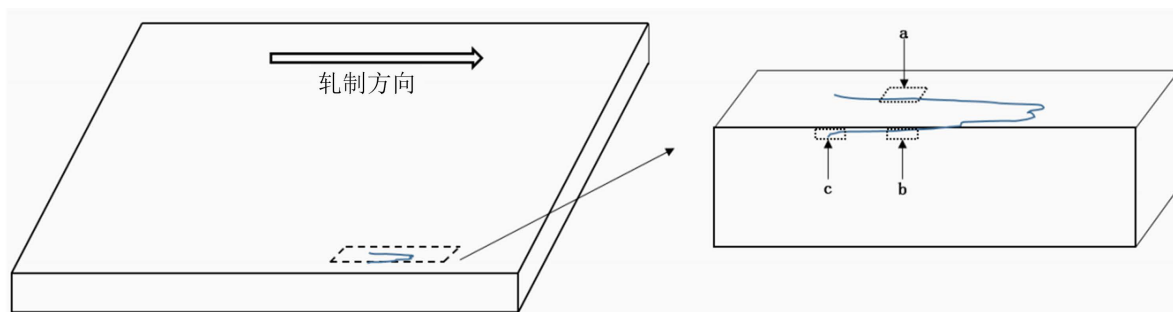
Sampling diagram for surface peeling defects of stainless steel hot-rolled plates
